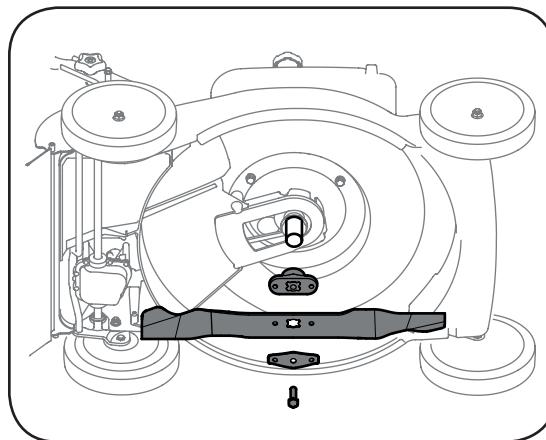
Remove the bolt, support, blade, and adapter to access the blade and underside components.
